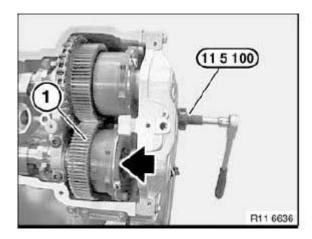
Identifying Special Tool 11 5 100 Courtesy of BMW OF NORTH AMERICA, INC.
